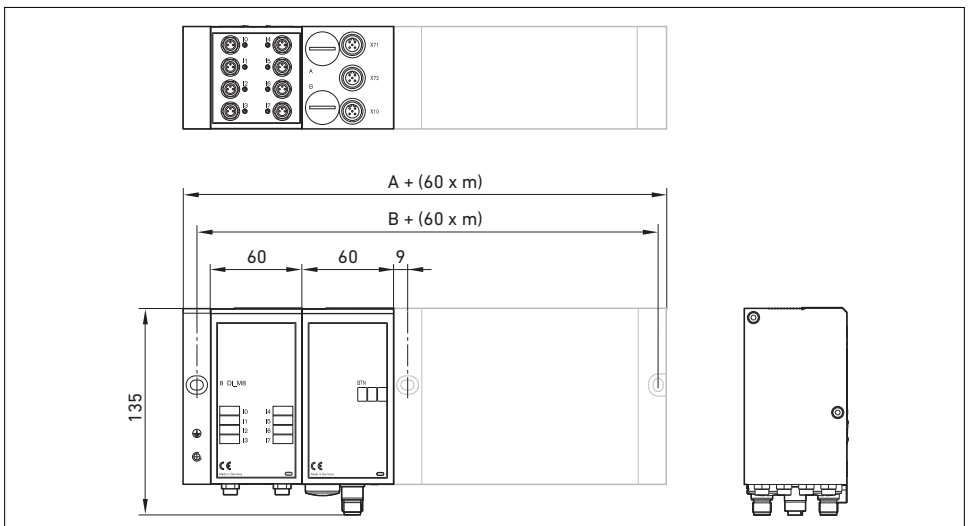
Dimensioned drawing of the valve system (bus coupler and valves)
